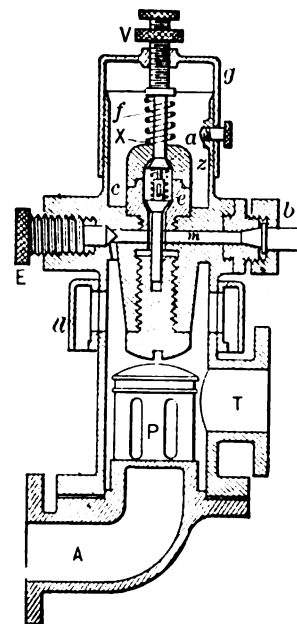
SECTION OF LEPAPE CARBURETTOR.
